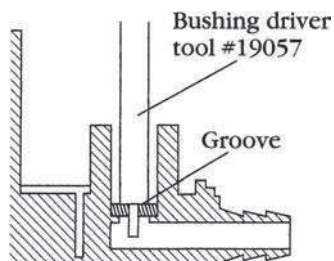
Press the fuel-inlet seat home with the grooved side of the seat down, toward the incoming fuel stream. A flat punch, sized to seat OD, can be used in lieu of the factory tool shown.
